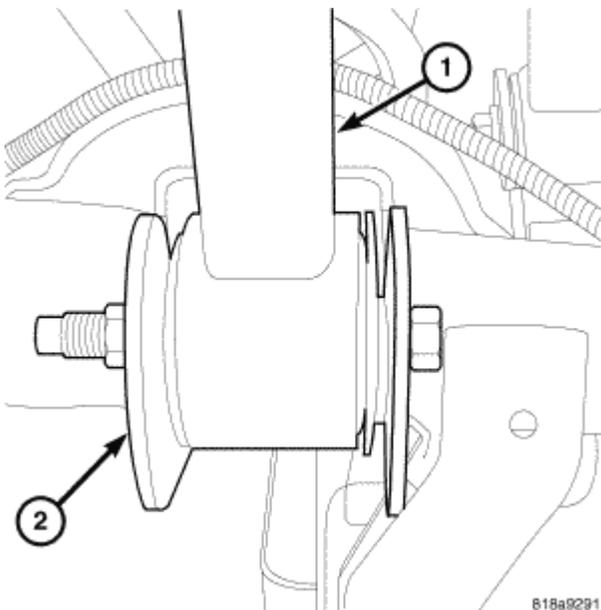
Identifying Lower Control Arm & Axle Brackets
